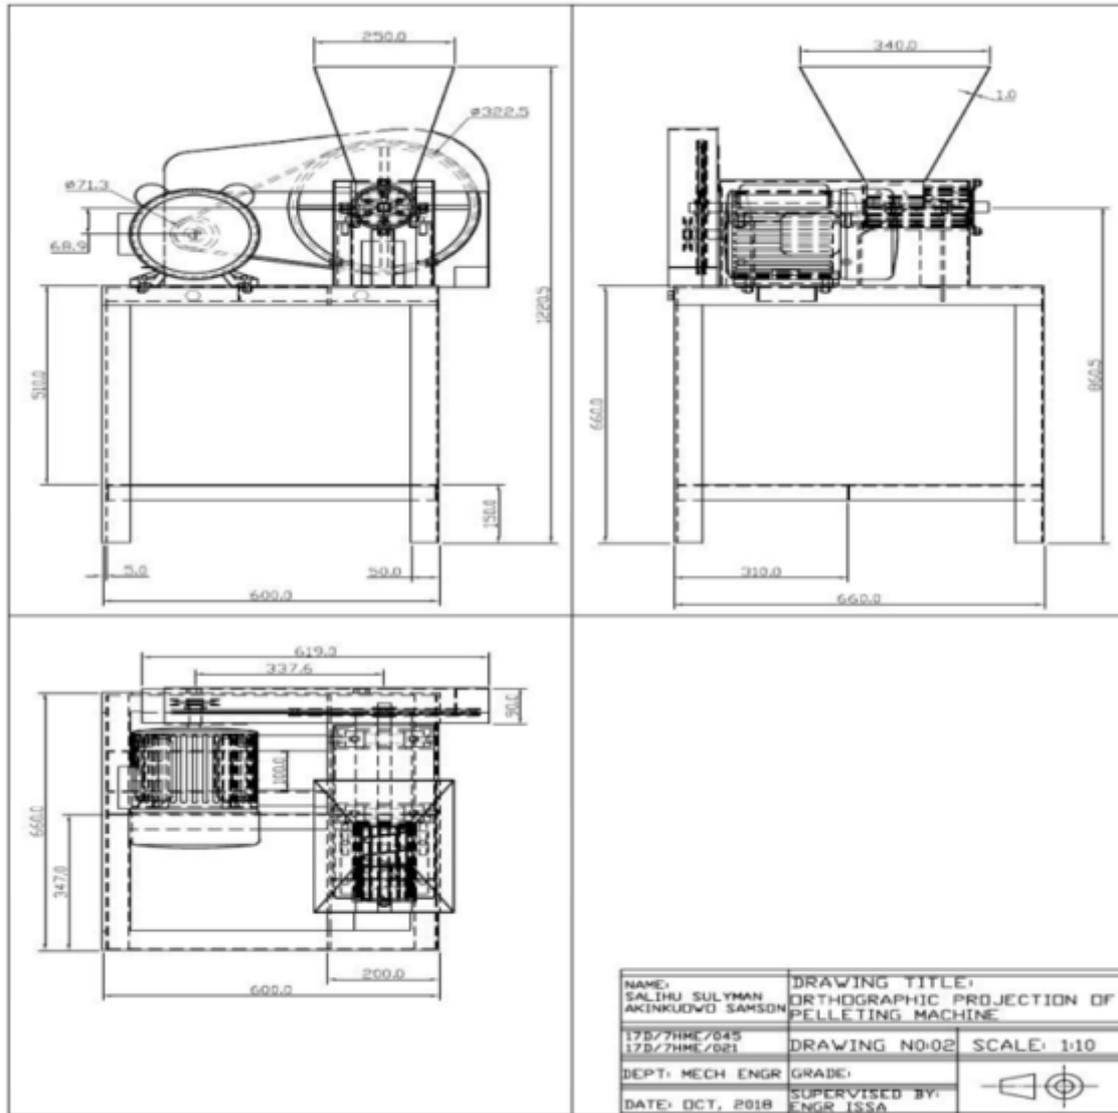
Orthographic View of the Fish Feed Pelletizing Machine
